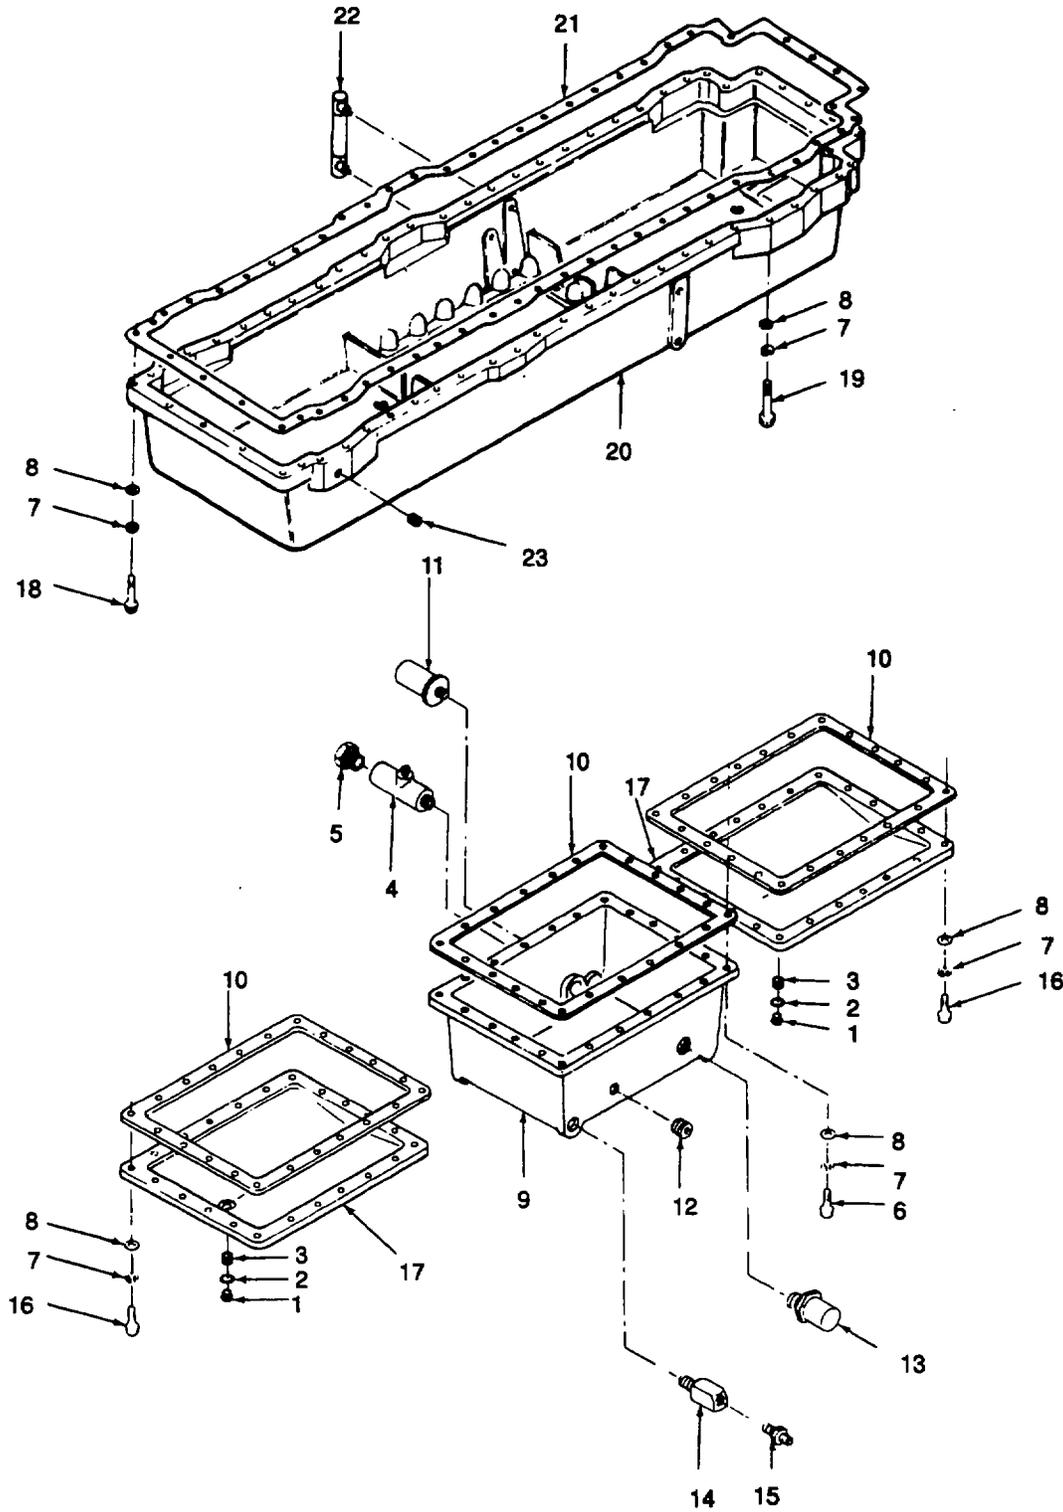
Removal and Installation of Oil Pan Assembly (Sheet 1 of 2)
